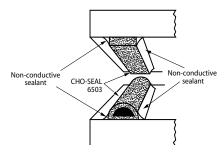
"Seal-to-seal" design incorporating CHO-SEAL 6503 conductive nickel-aluminum fluorosilicone gaskets on both mating flange surfaces. Gaskets are bonded and edge sealed to prevent moisture from entering the gasket/flange area.
